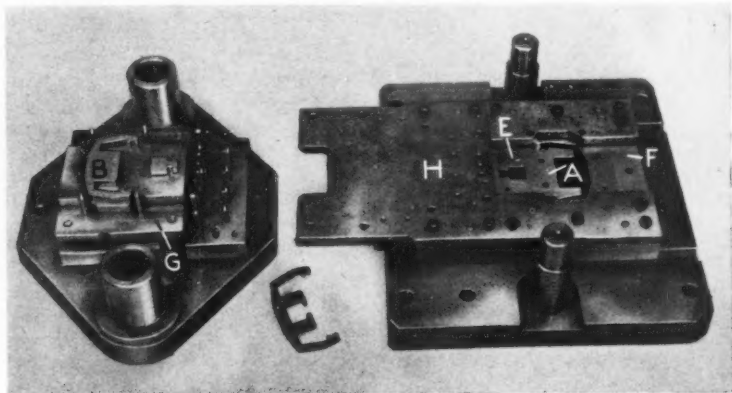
Follow-on Press Tool With Solid Tungsten Carbide Die Section for Producing Electricity Meter Laminations
